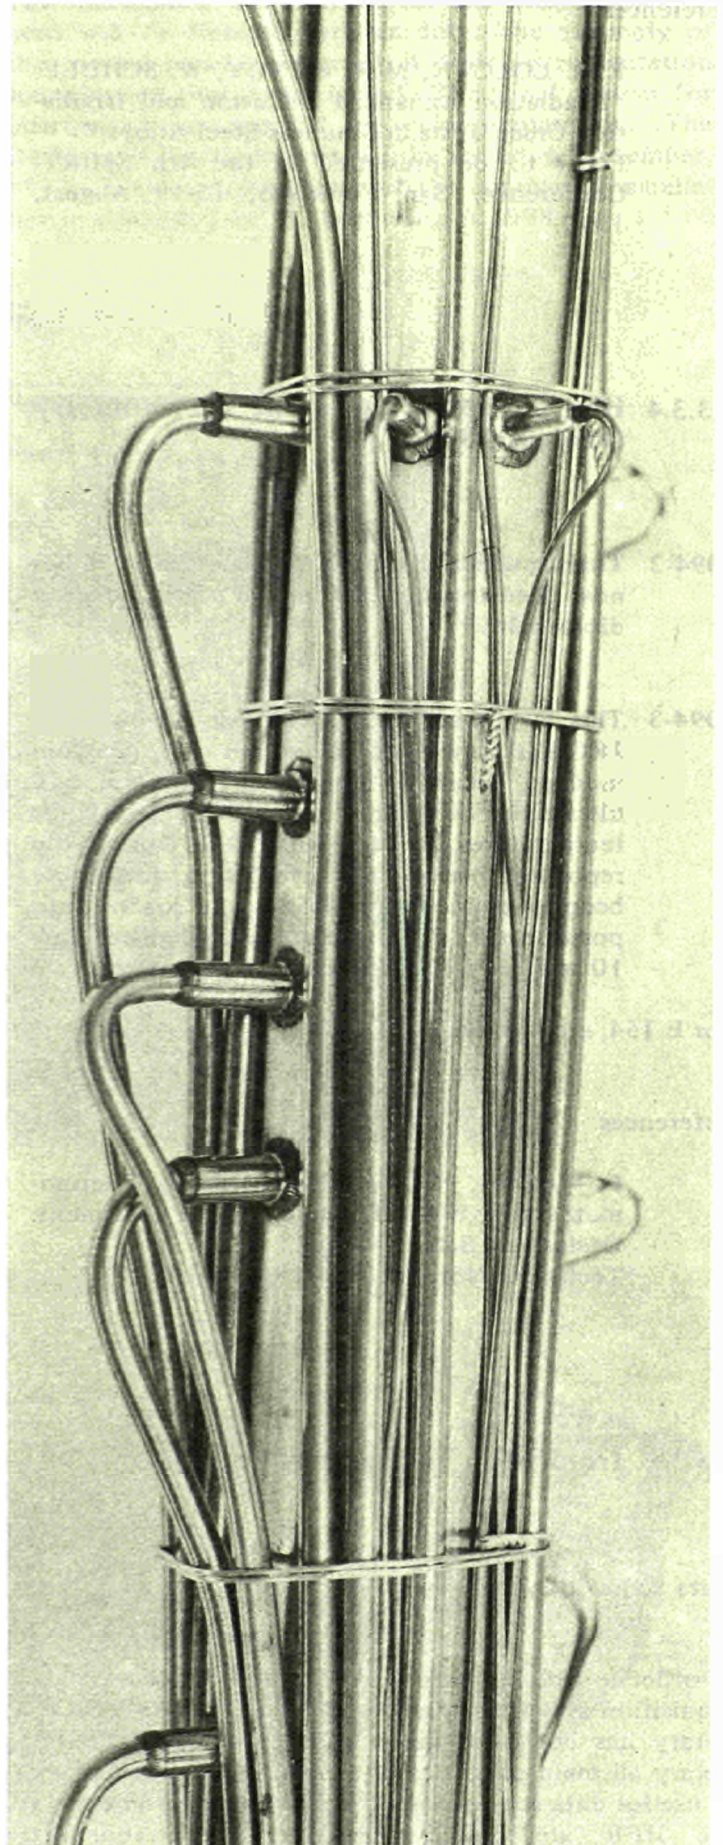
Laser welded thermocouple penetrations in st.st tube wall.
